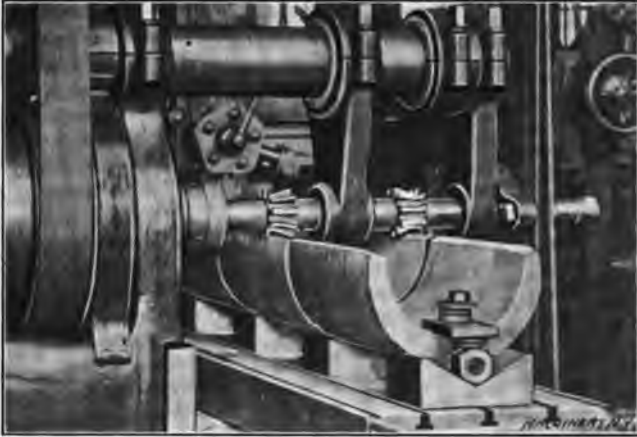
Milling the Edge of the Crown Brasses for the Fit in the Main Bearing Casting
